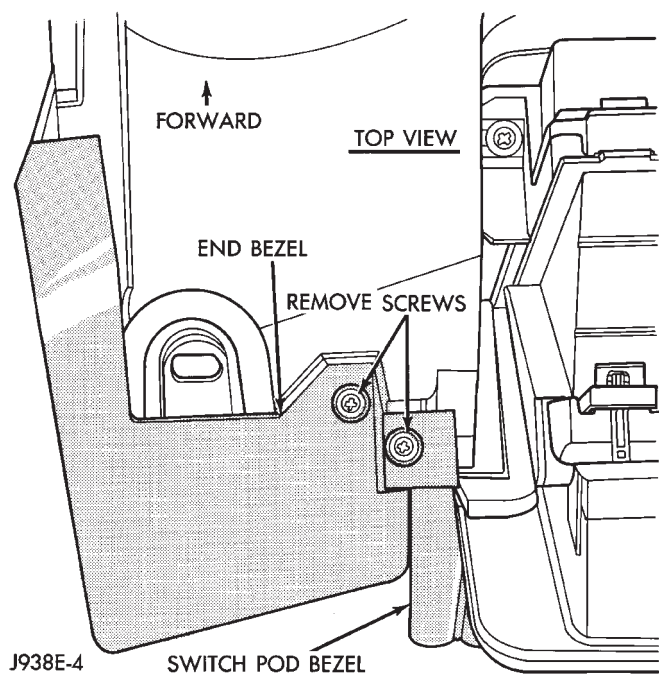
Remove Screws Holding Bottom Of Bezels
